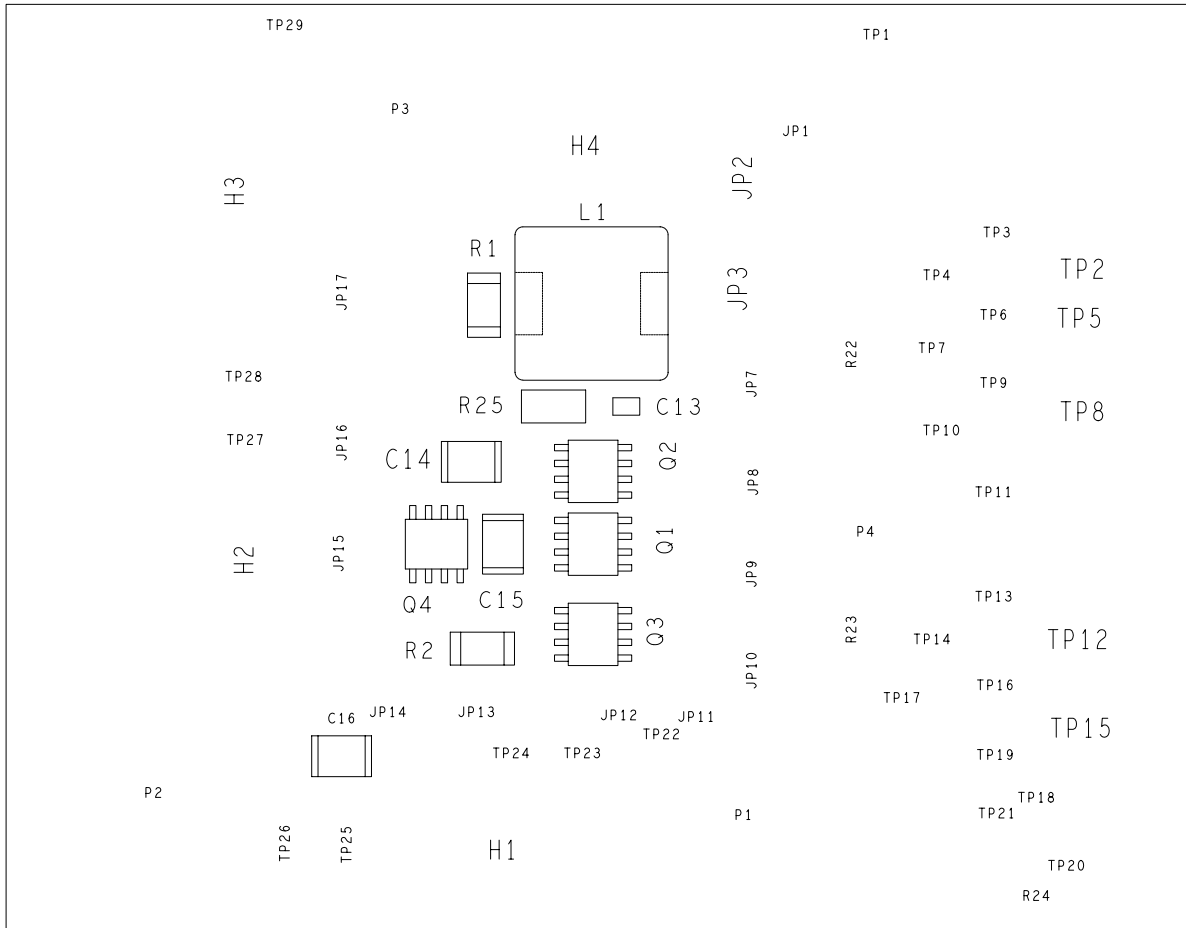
BOTTOM SILK AND ASSEMBLY
